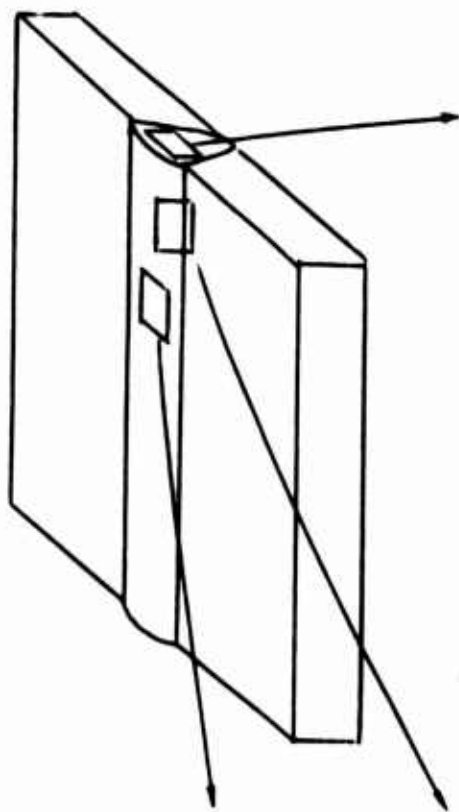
MACROSTRUCTURE AND HARDNESS MEASUREMENTS IN AN ELECTRON BEAM WELD WITHOUT FILLER METAL
